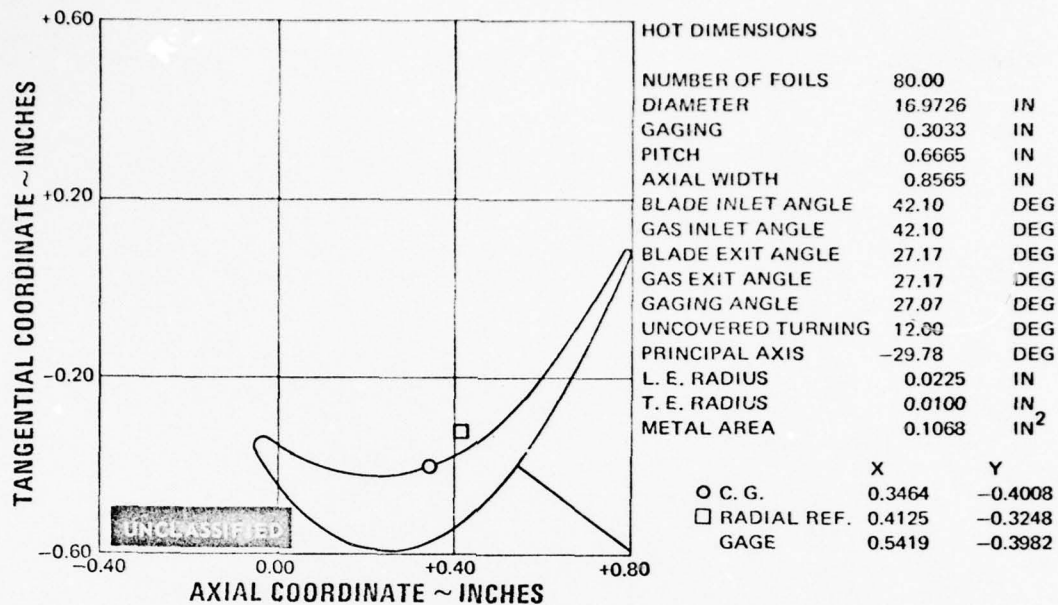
Recambered Second Vane, 1/4 Root Section (BB)
